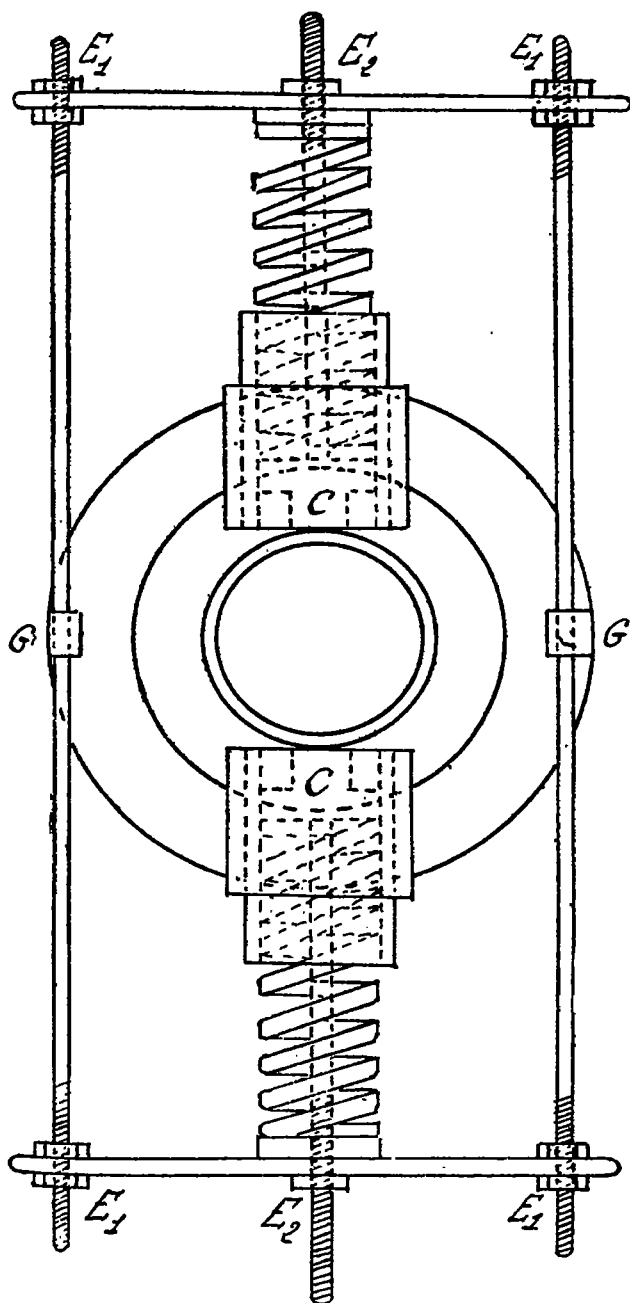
Detail of the clamping mechanism of Pignot's machine.
